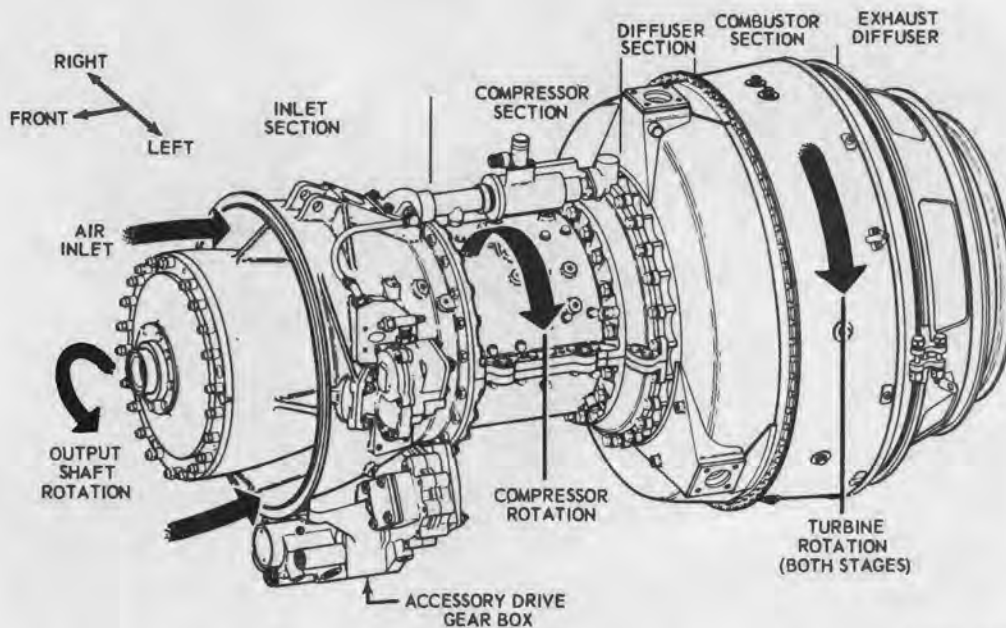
UH-1B Power plant installation — LH side (typical)
